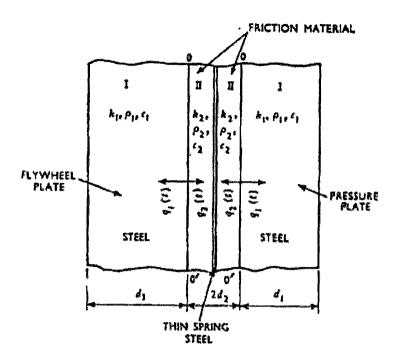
Section of Pressure Plate, Friction Disc and Flywheel Plate [17]
